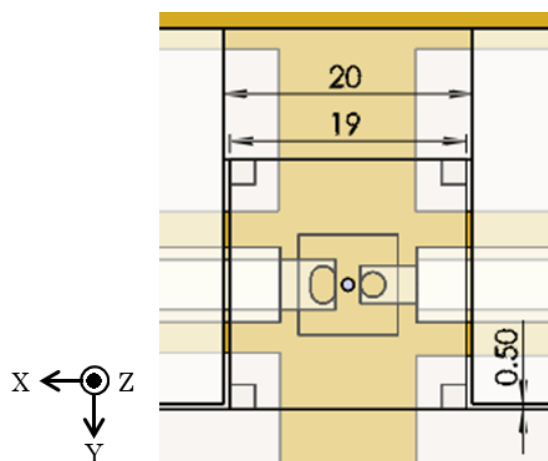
Enlarged view of part A in Fig. 2.11
